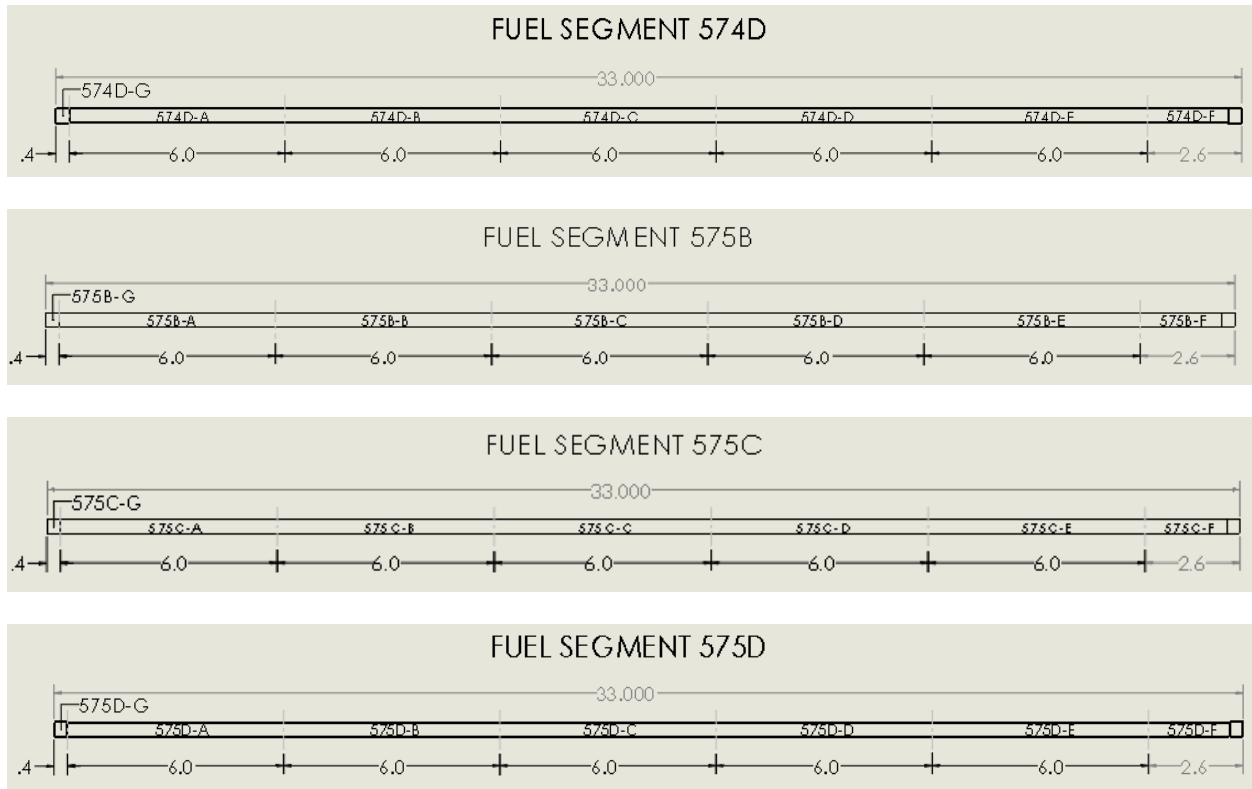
Cutting plan of BWR Limerick SNF rods for CIRFT testing.⁹
